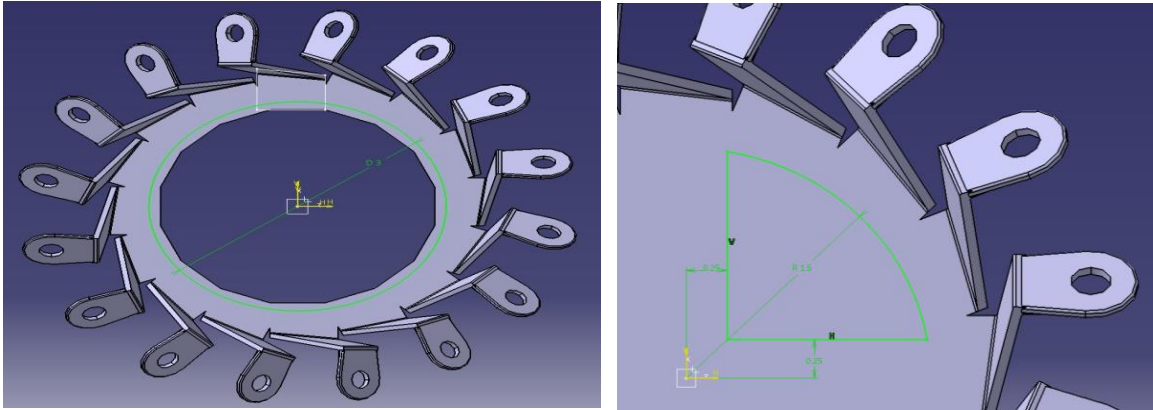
Design and Dimension of Pad and the Dimension of the Quadrant
